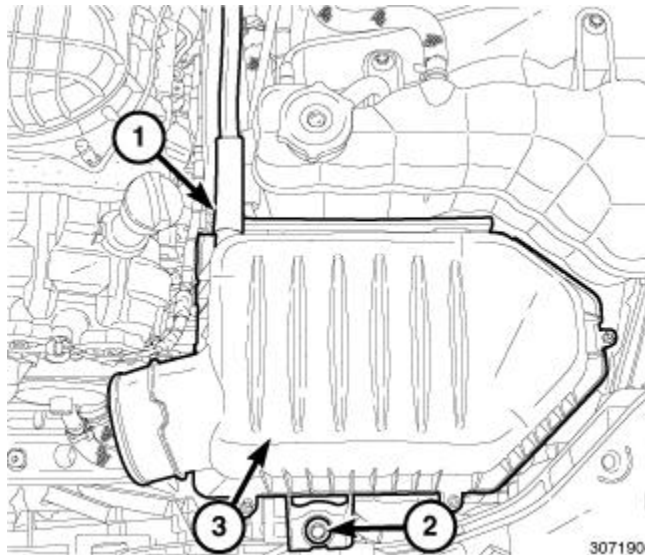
Fresh Air Makeup Hose, Air Cleaner Housing & Bolt
